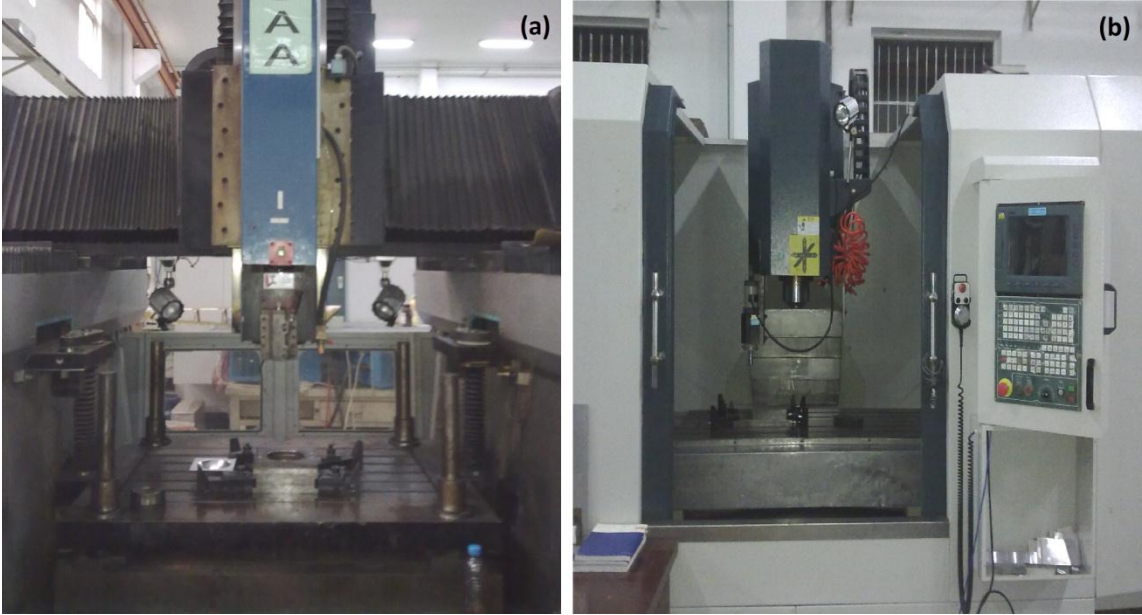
Machine with the fixed tool holder (a); machine with the rotating spindle (b)
